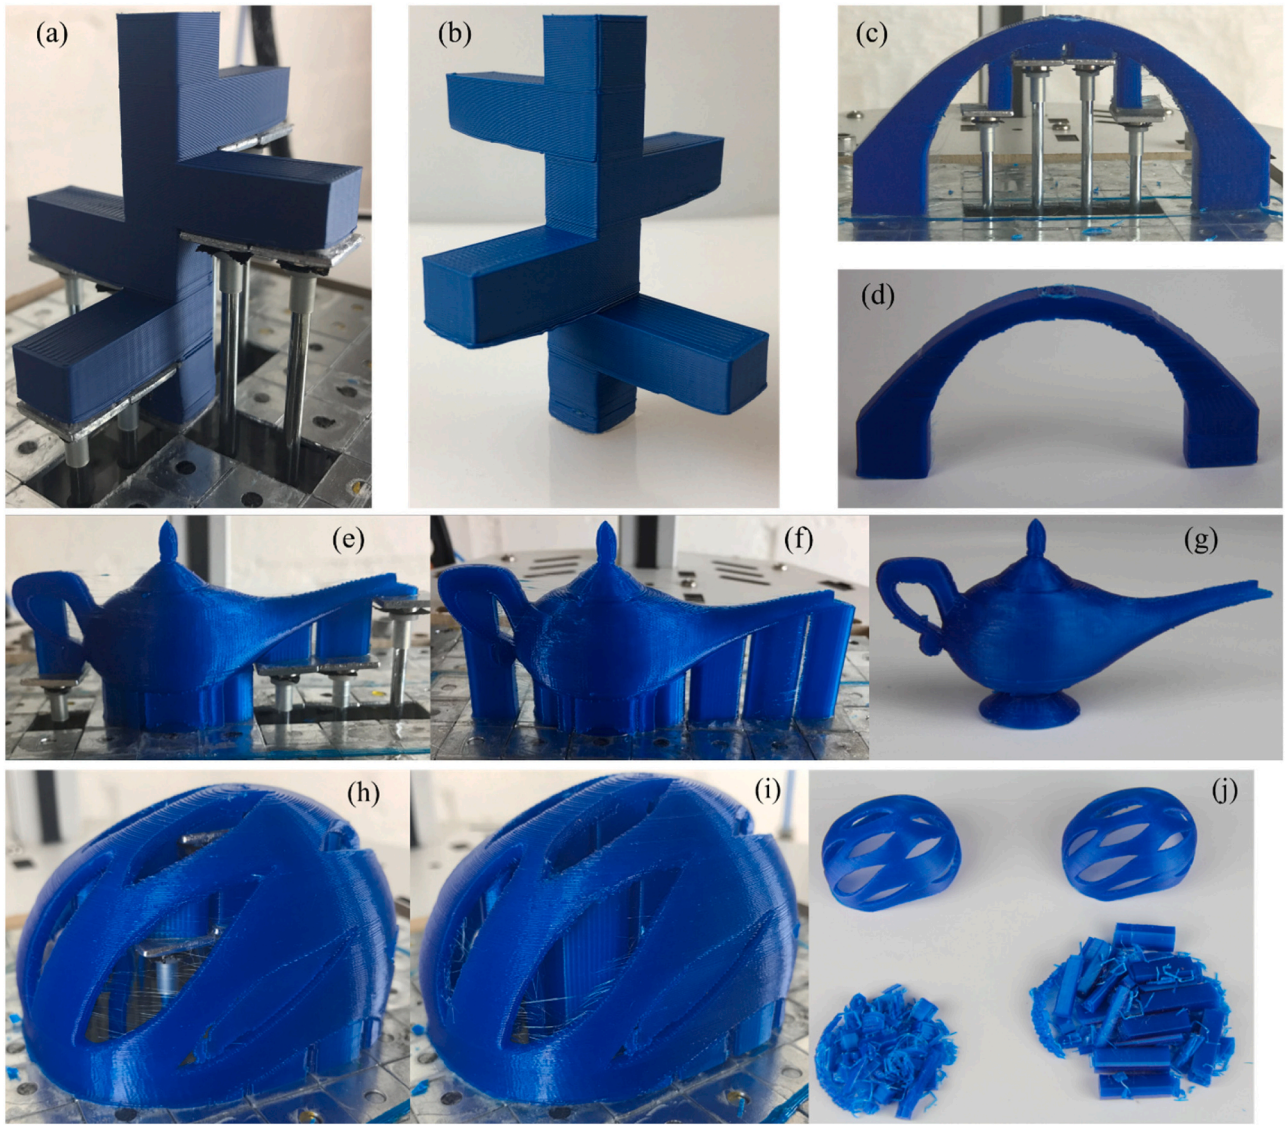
Printing results of the test cases. (a) The printing result of a four-overhang model with reusable support; (b) the 3D-printed part after the cleanup; (c) the printing result of a bridge model with reusable support; (d) the printed bridge after the cleanup; (e) the printing result of a teapot model with reusable support; (f) the printing result of the teapot without reusable support; (g) the printed teapot after the cleanup; (h) the printing result of a helmet model with reusable support; (i) the printing result of the helmet without reusable support; and (j) a comparison of the supporting material in (h) and (i).
